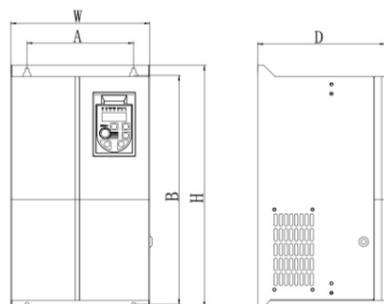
Schematic Diagram of 30~75kW Sheet Metal Enclosure and Installation Dimensions
